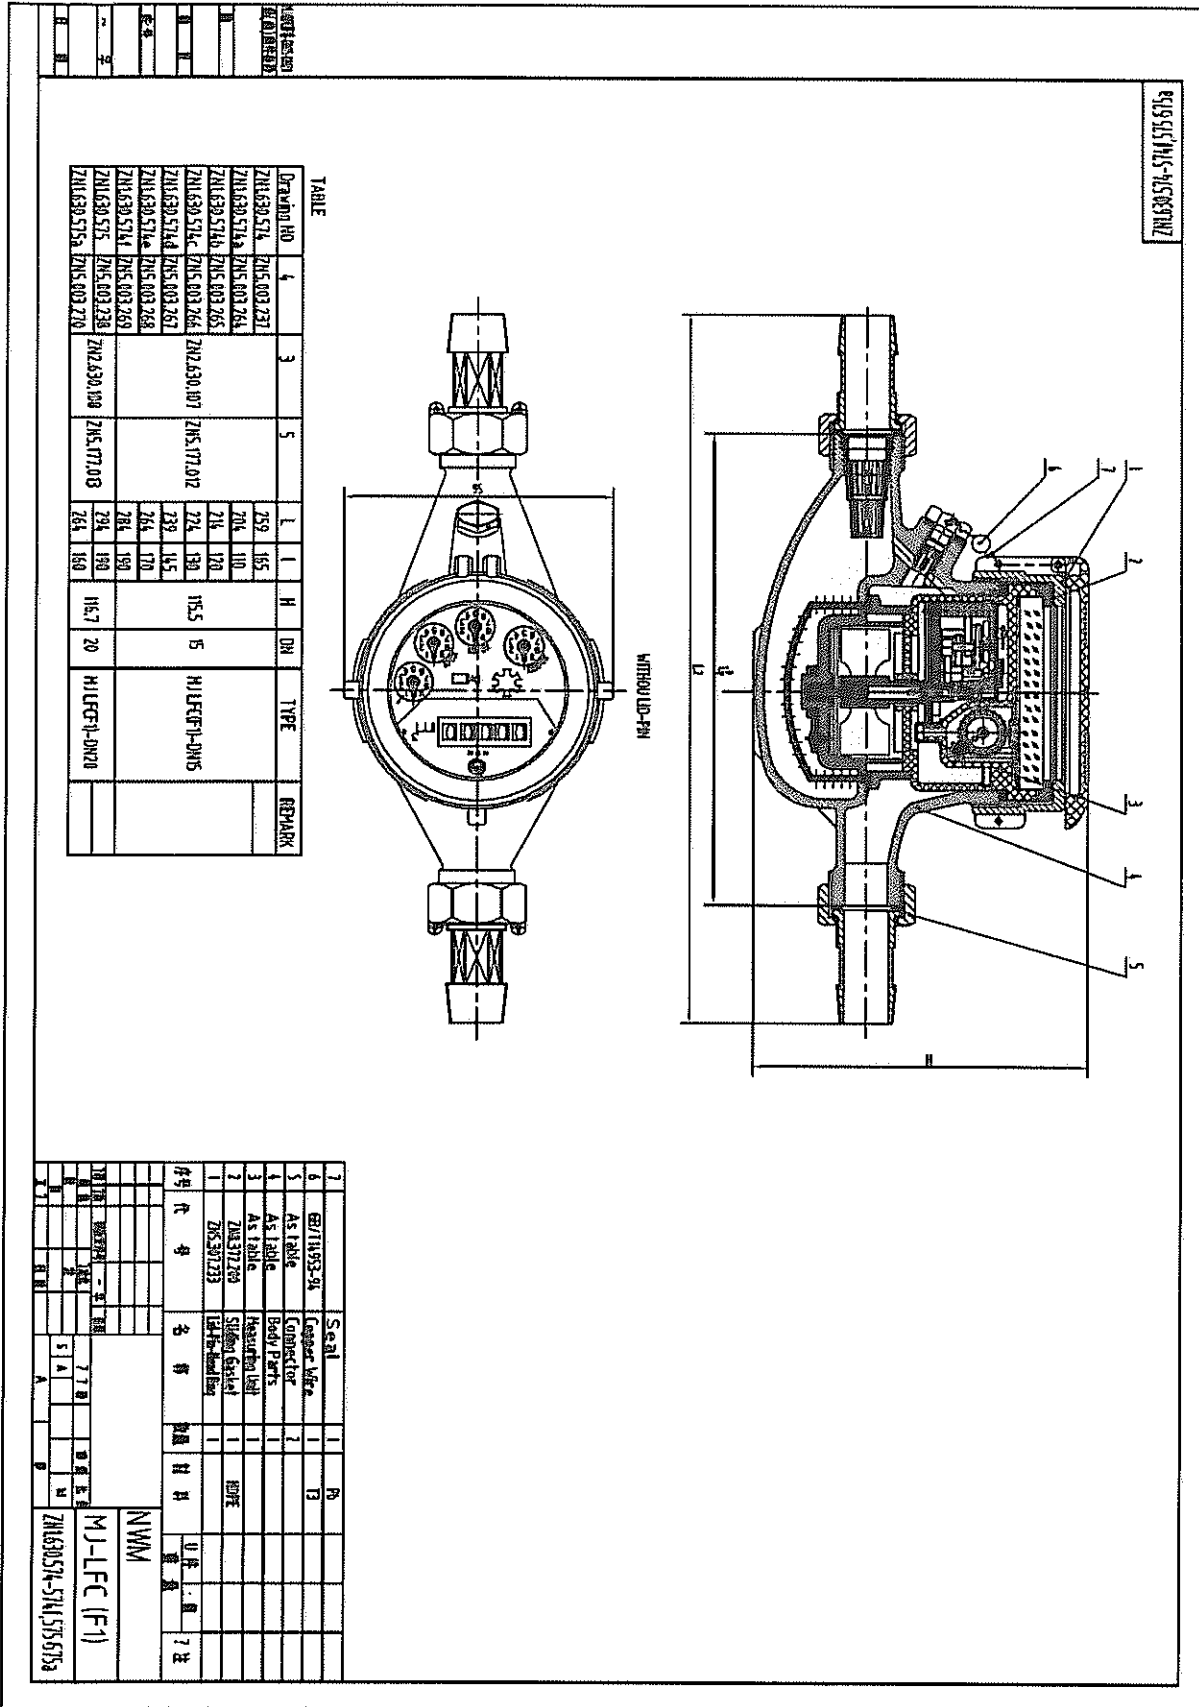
The water meter type MJ-LFC (F10) assembly drawings:
